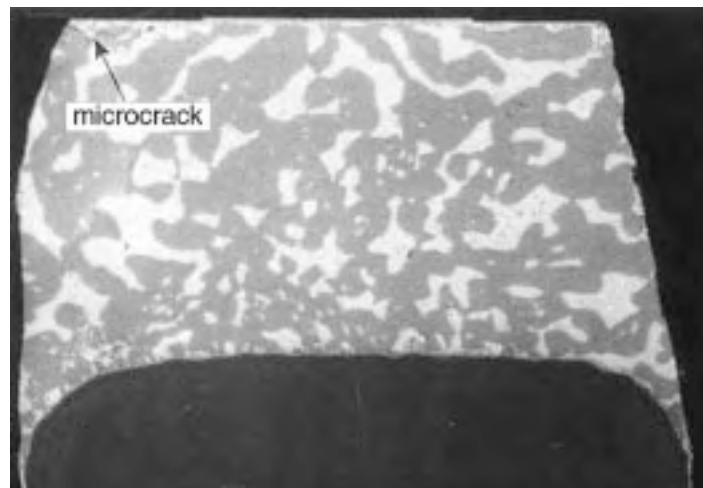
Crack initiation visible in a cross-sectioned solder joint where acoustic imaging had indicated crack formation.
